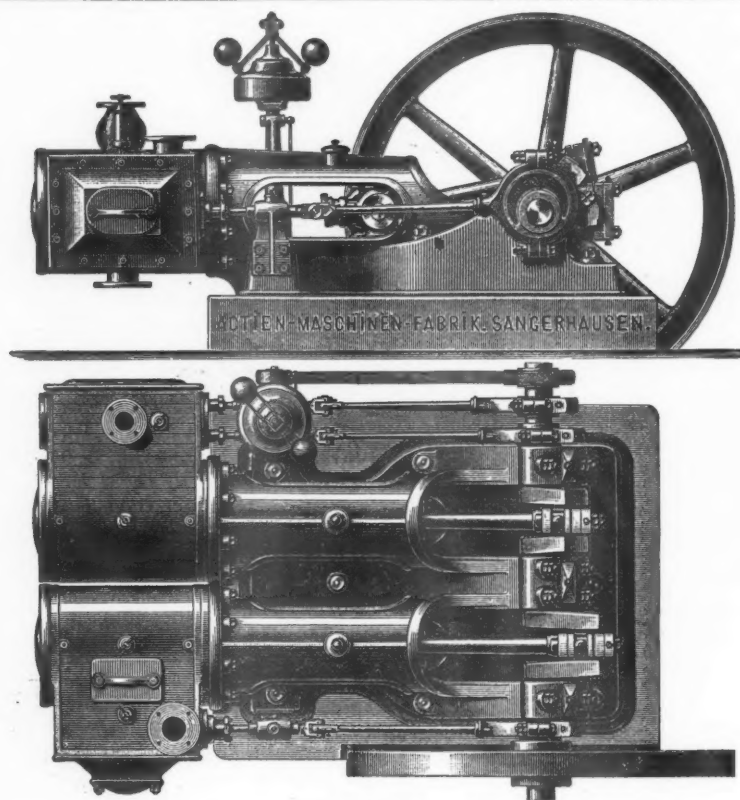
DOUBLE CRANK DRY SLIDE VALVE AIR COMPRESSOR.
